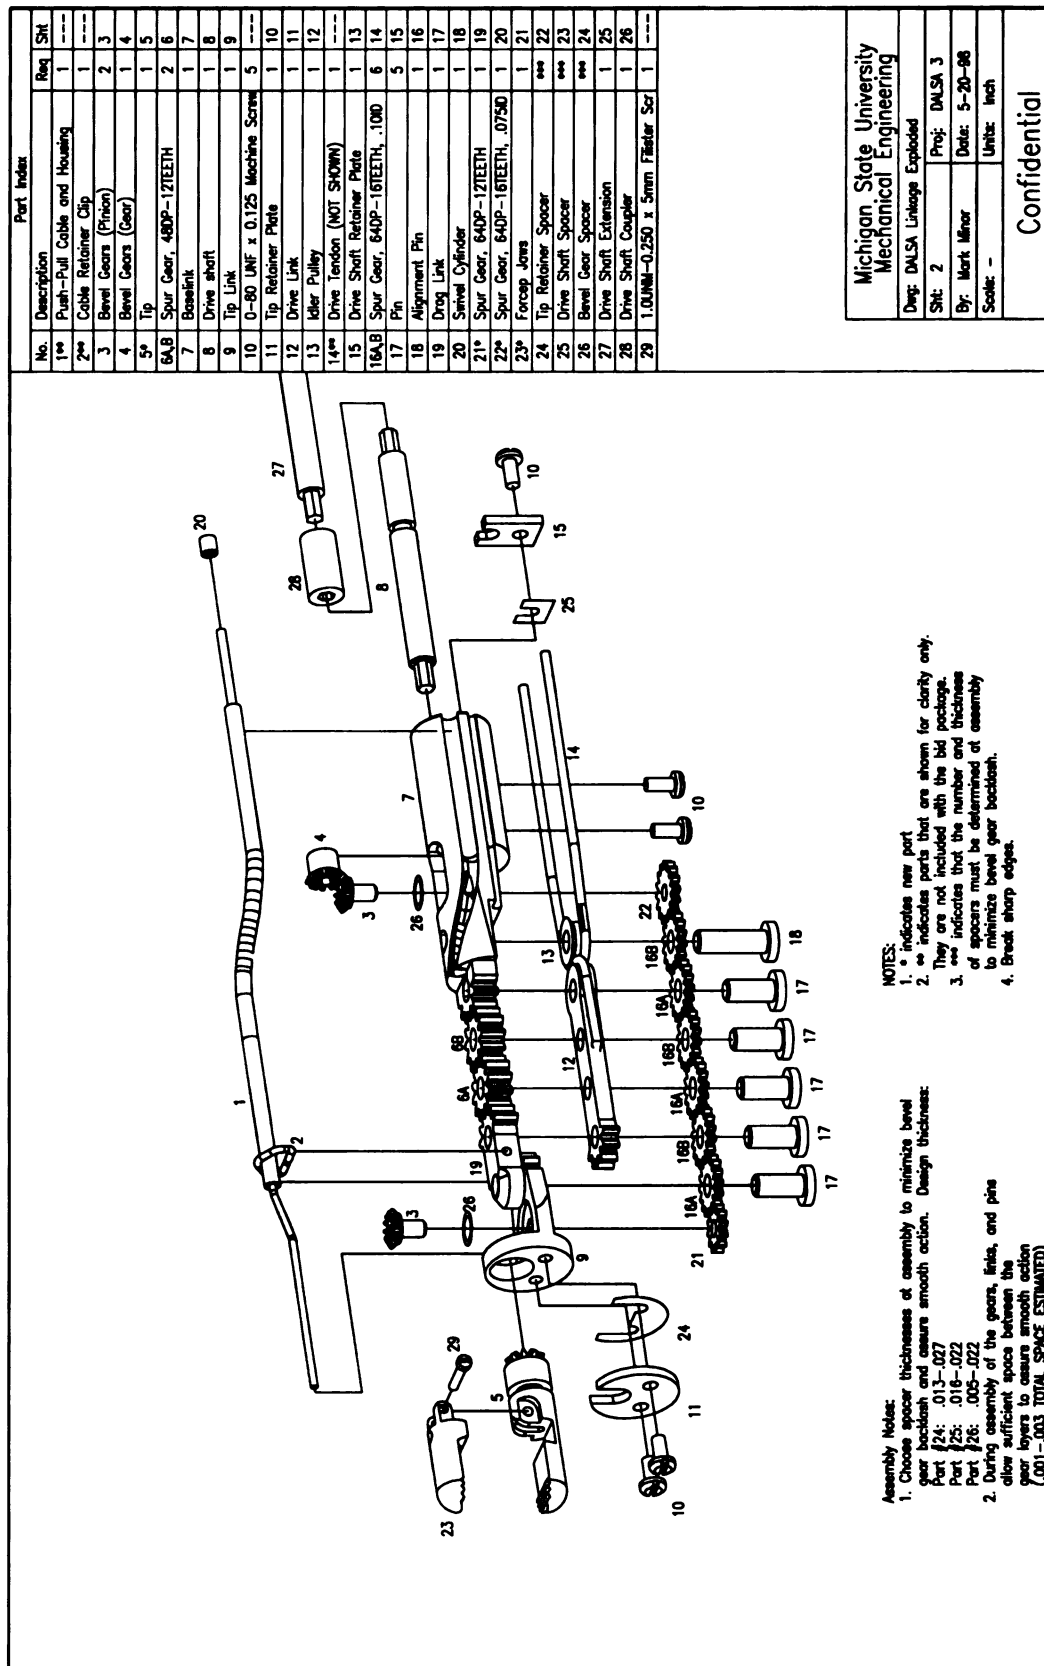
Exploded view of DALSA surgical mechanism (sheet 2).
